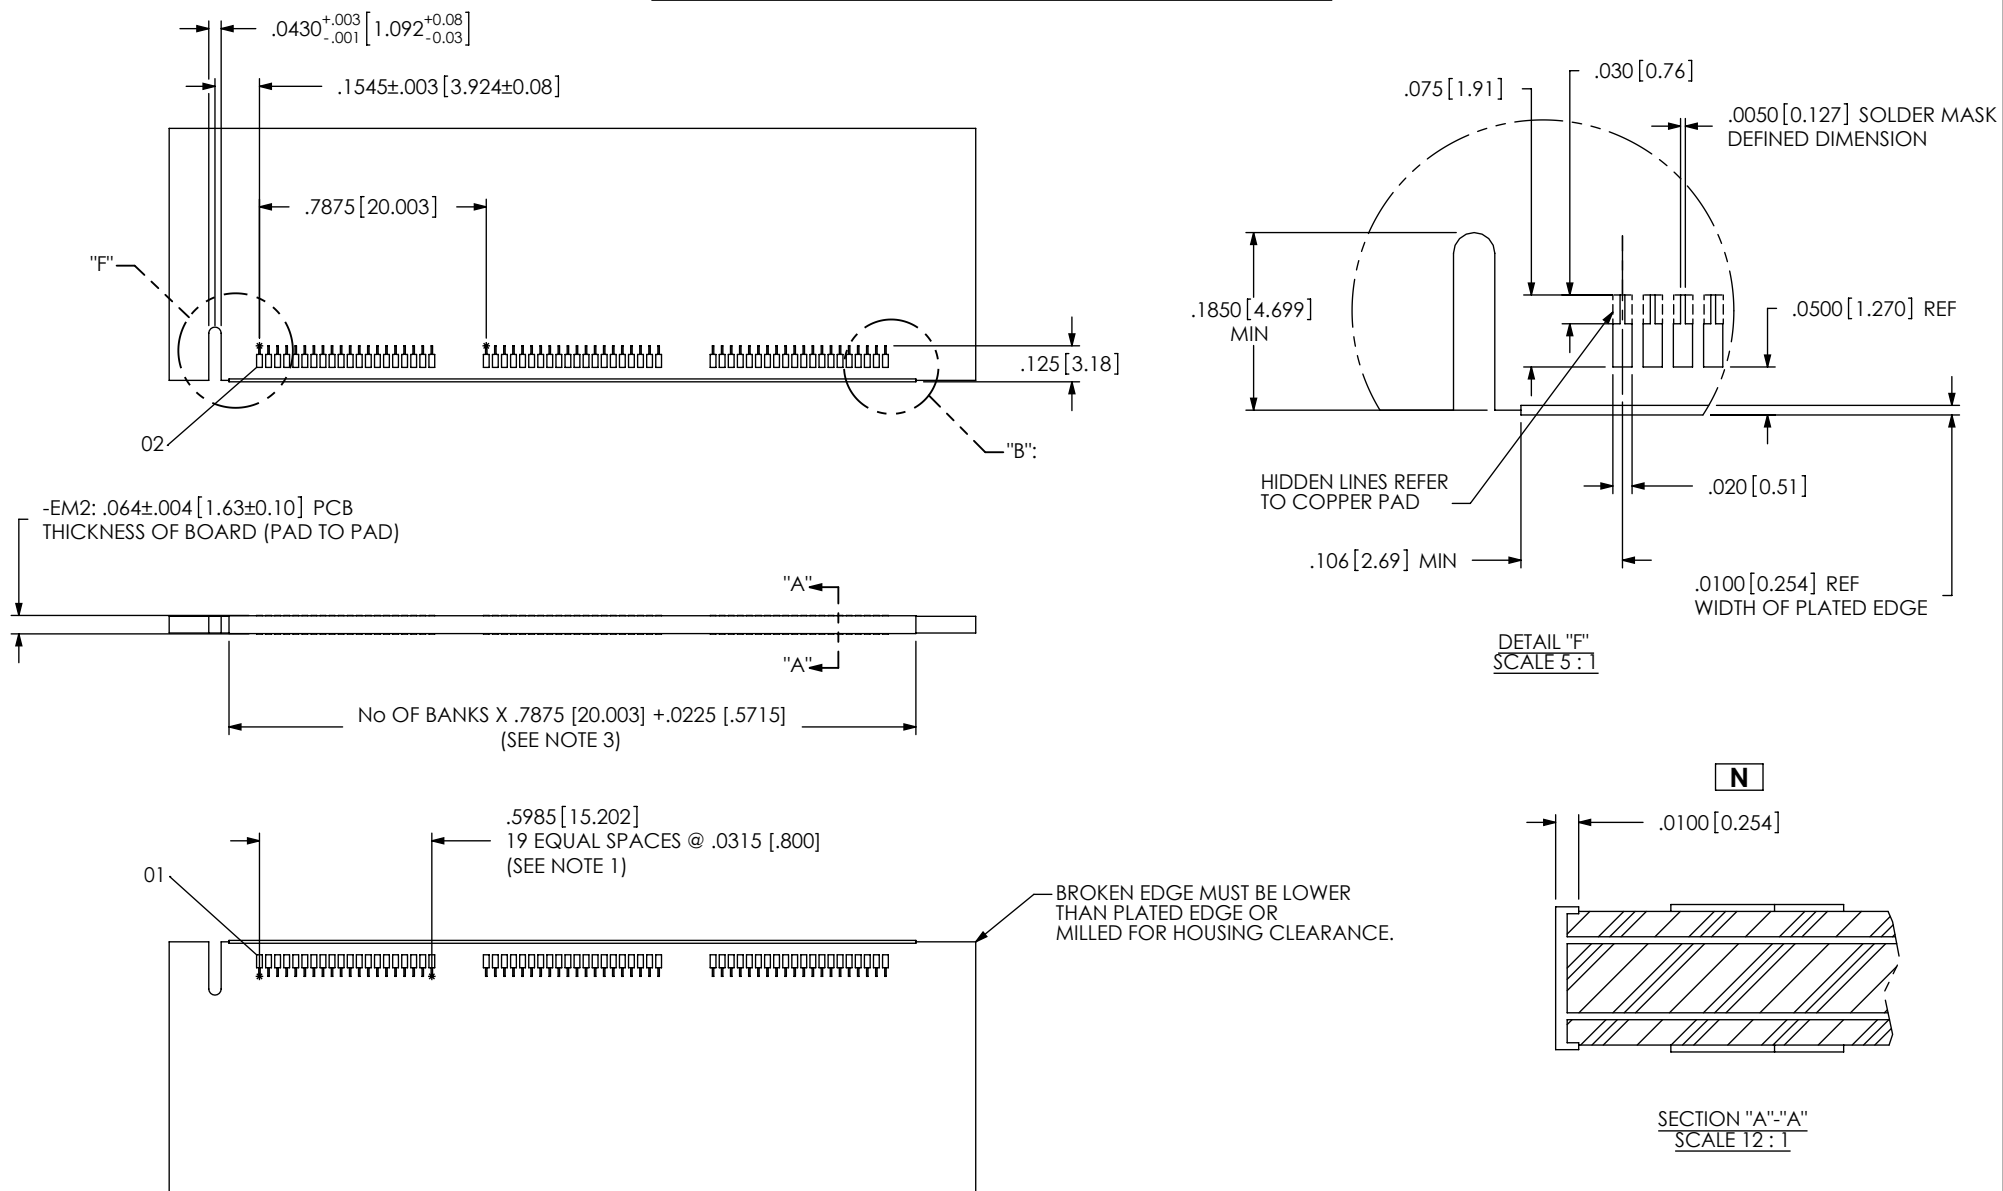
RECOMMENDED PCB LAYOUT FOR STANDARD DESIGNS
